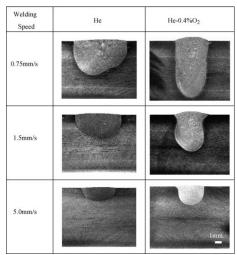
Weld shapes at different welding speeds for pure He and He-0.4%O2 shielding gases [45]
